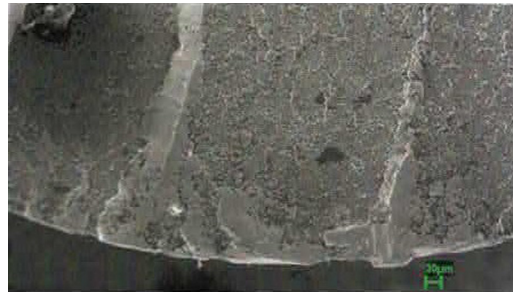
Fractography – ratched marks are observed at the fracture initial points [26]
